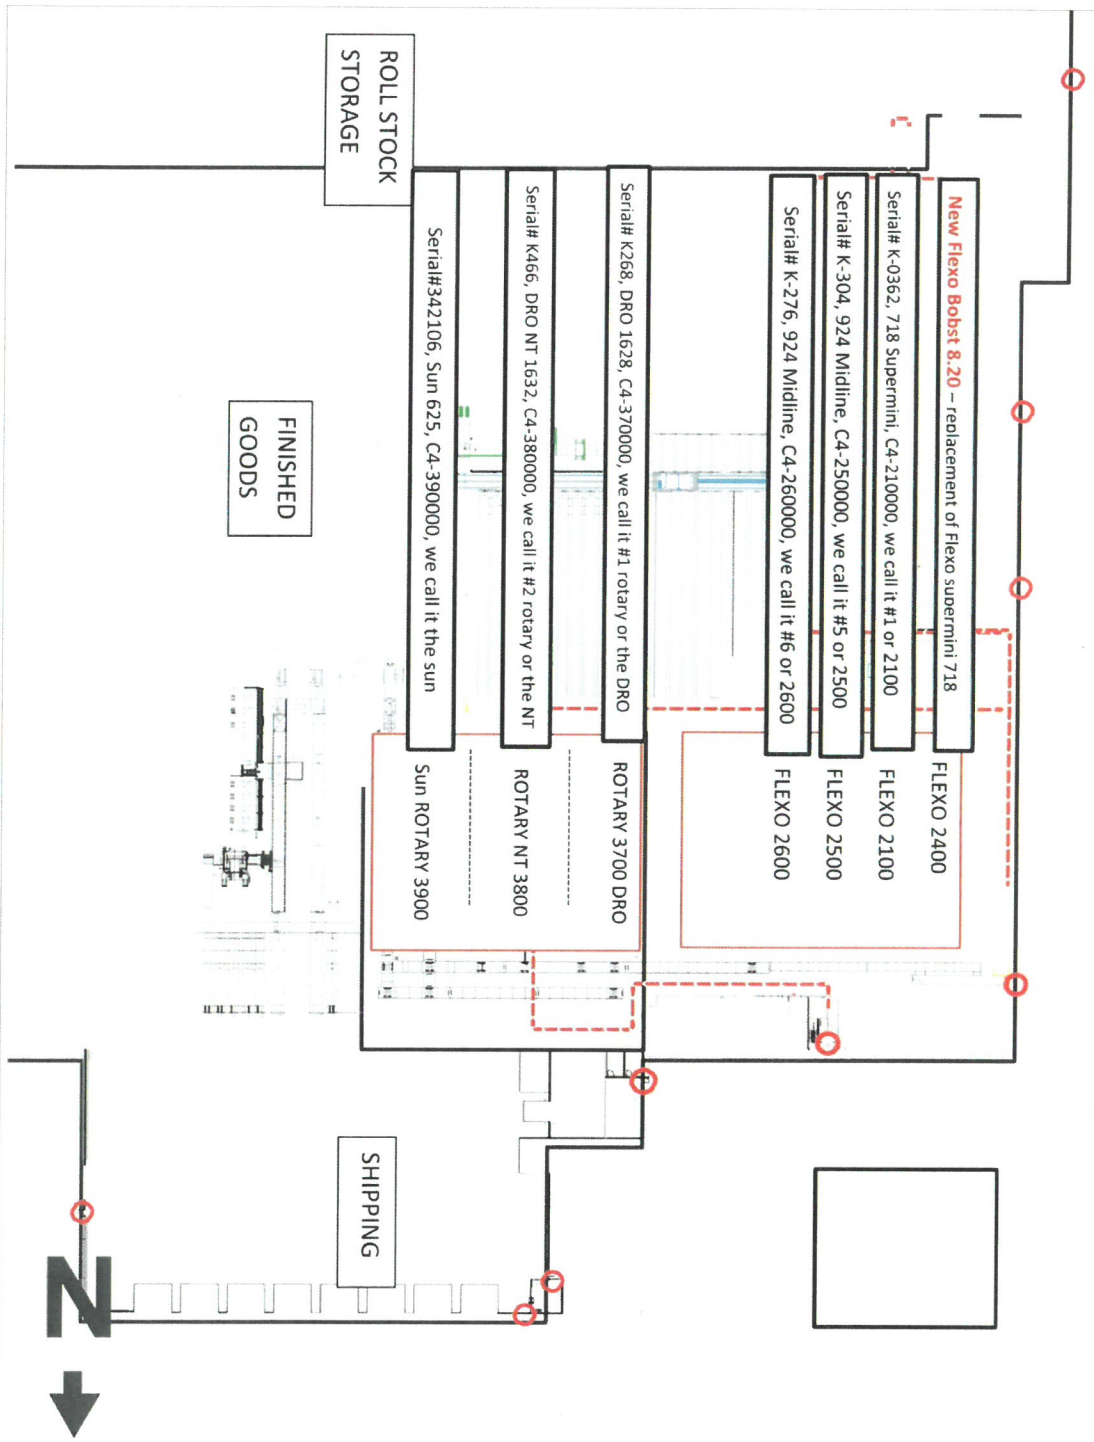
Floor plan of the Facility after the installation of the new Flexo Bobst 8.20
